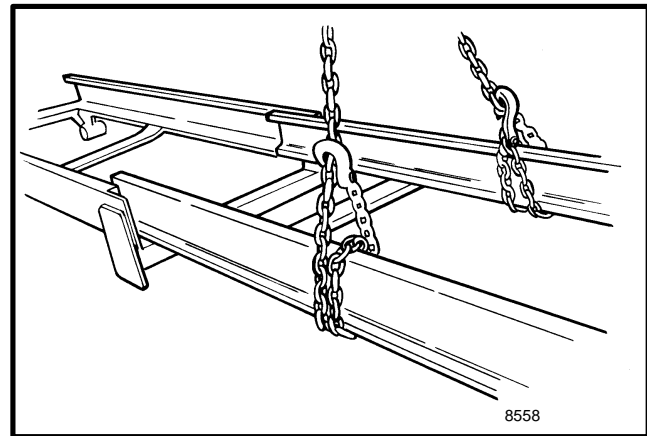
REMOVAL OF INNER WELDMENT
